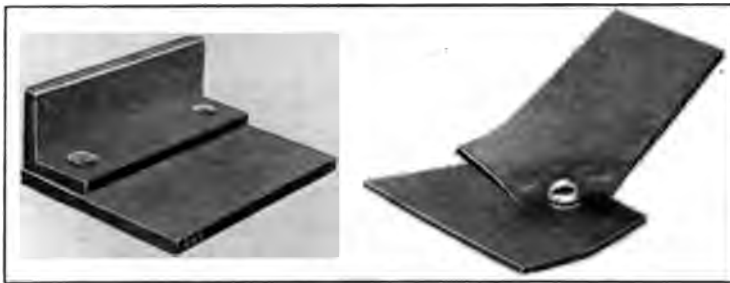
ONE PIECE OF ANGLE IRON TO FLAT PLATE. TWO SPOTS.
